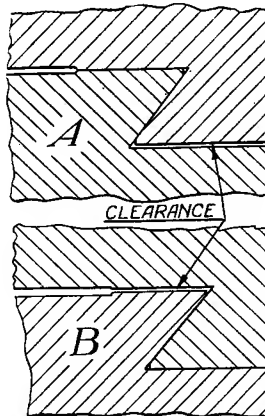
No attempt is made to obtain a sliding fit between both the upper and lower parallel faces, but a clearance is left between one pair.
